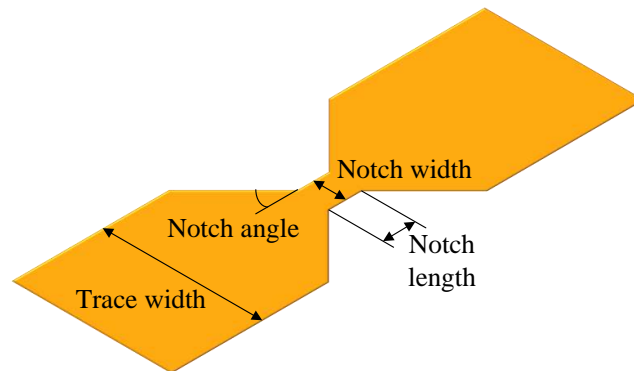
Notch design for PCB trace underneath the on-board current sensor IC.
